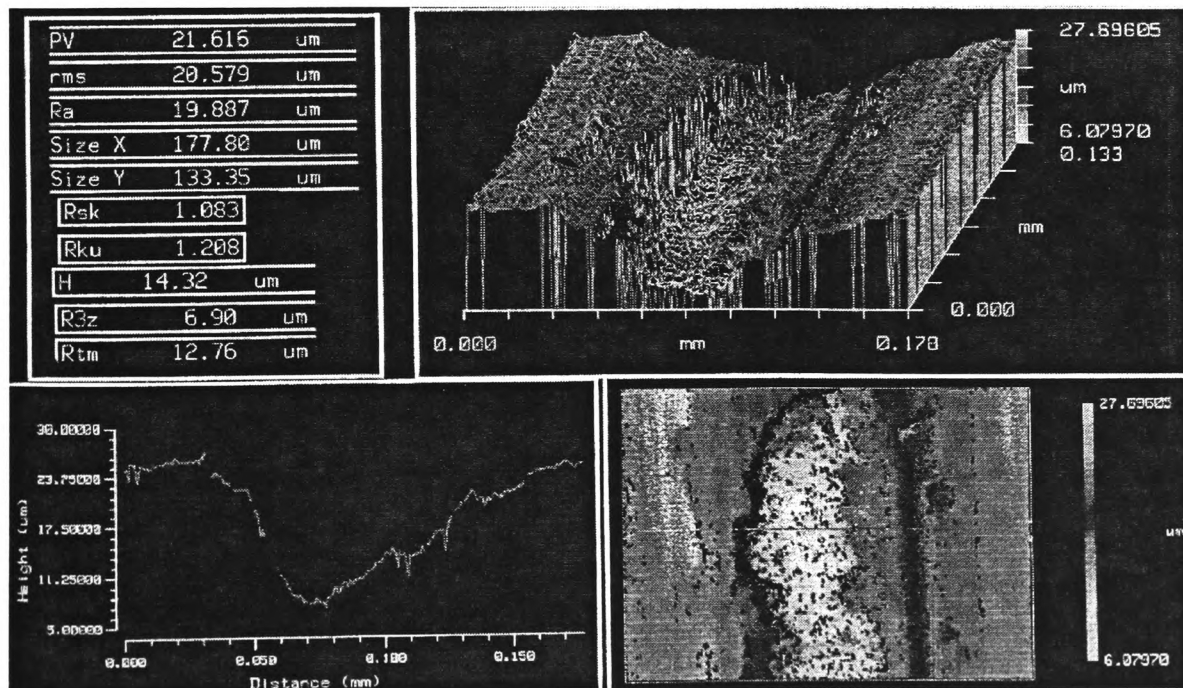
Depth of surface crack and machine marks on the ground surface at 91 μm depth of cut, 24 m/s wheel speed, 7 mm/s table feed, D126 grit size cast iron bond wheel and -0.3 grinding wheel/truing speed ratio.
